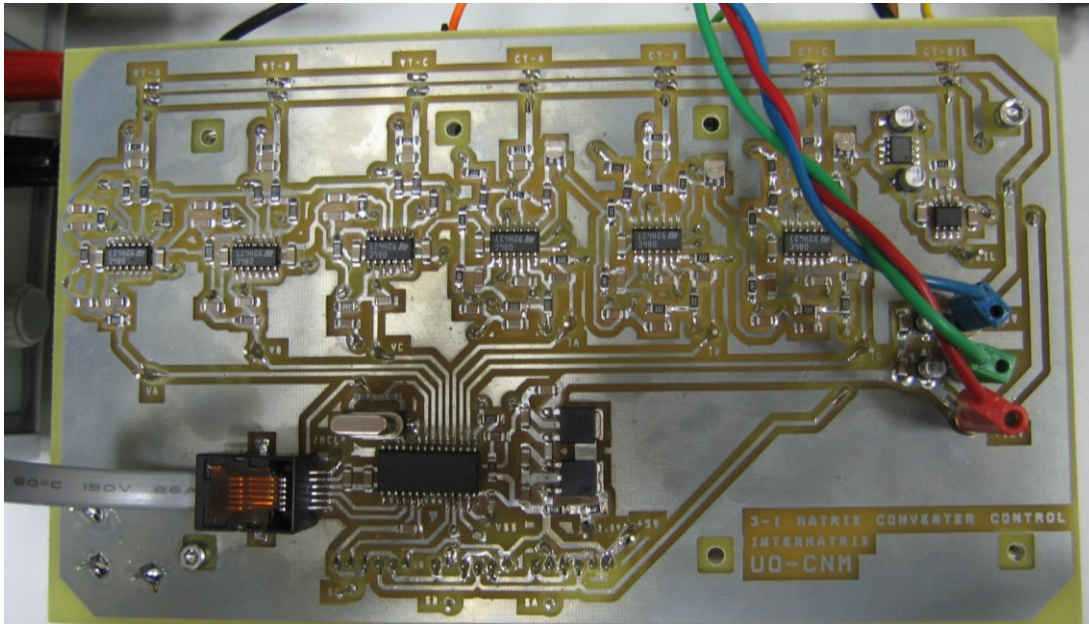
Fabricated control board of the three-phase to one-phase test MC
